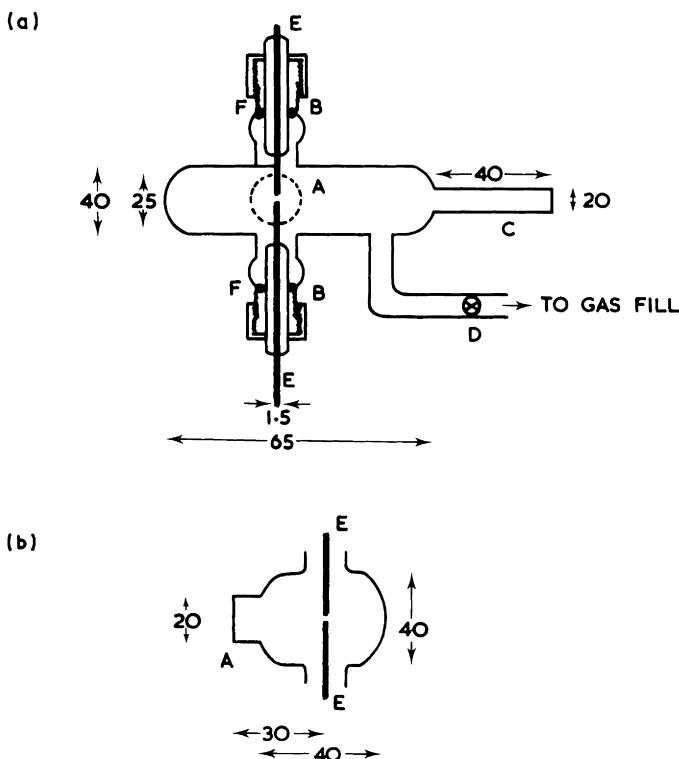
Design of low pressure Pyrex flash lamp (not drawn to scale: all dimensions in mm). A, Suprasil optical flat; B, Youngs PTT/10 stop cocks; C, arm for mounting; D, stop cock; E, tungsten electrodes; F, O-rings (included in B). (a) Front view; (b) side view.
